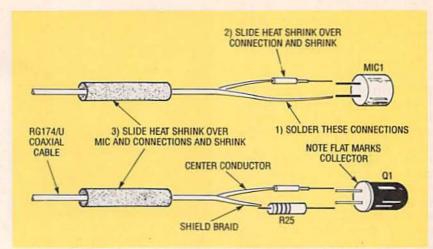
MAKE THE SENSOR ASSEMBLIES with heat-shrink tubing and small diameter coaxial cable such as RG-174/U. The space between the coaxial cable and the outer heat-shrink tubing is filled with a little silicone rubber.
